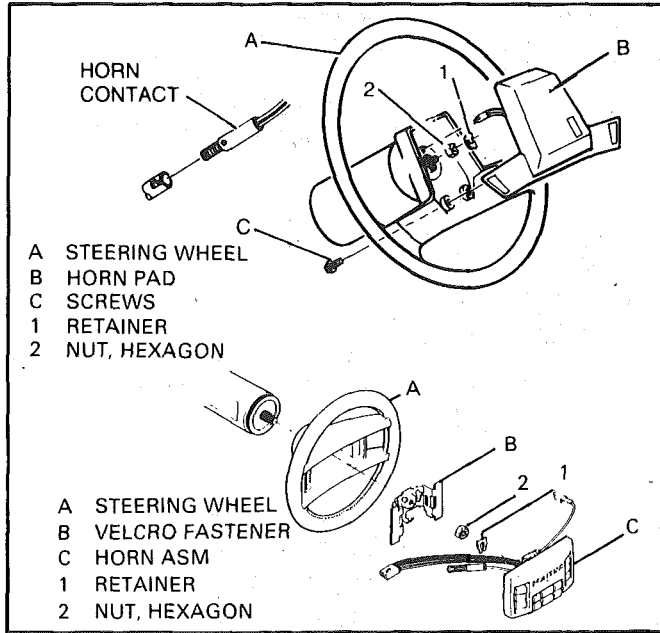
Removing Horn Pad, Retainer, and Jam Nut
